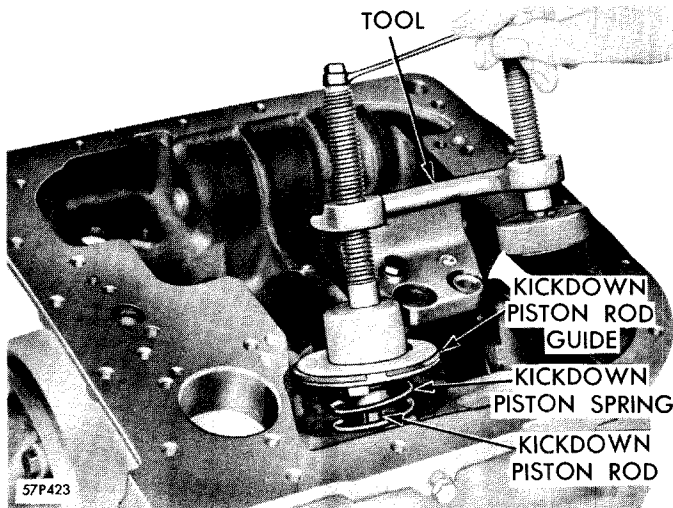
Removal and Installation of Kickdown Piston Rod Guide and Spring
